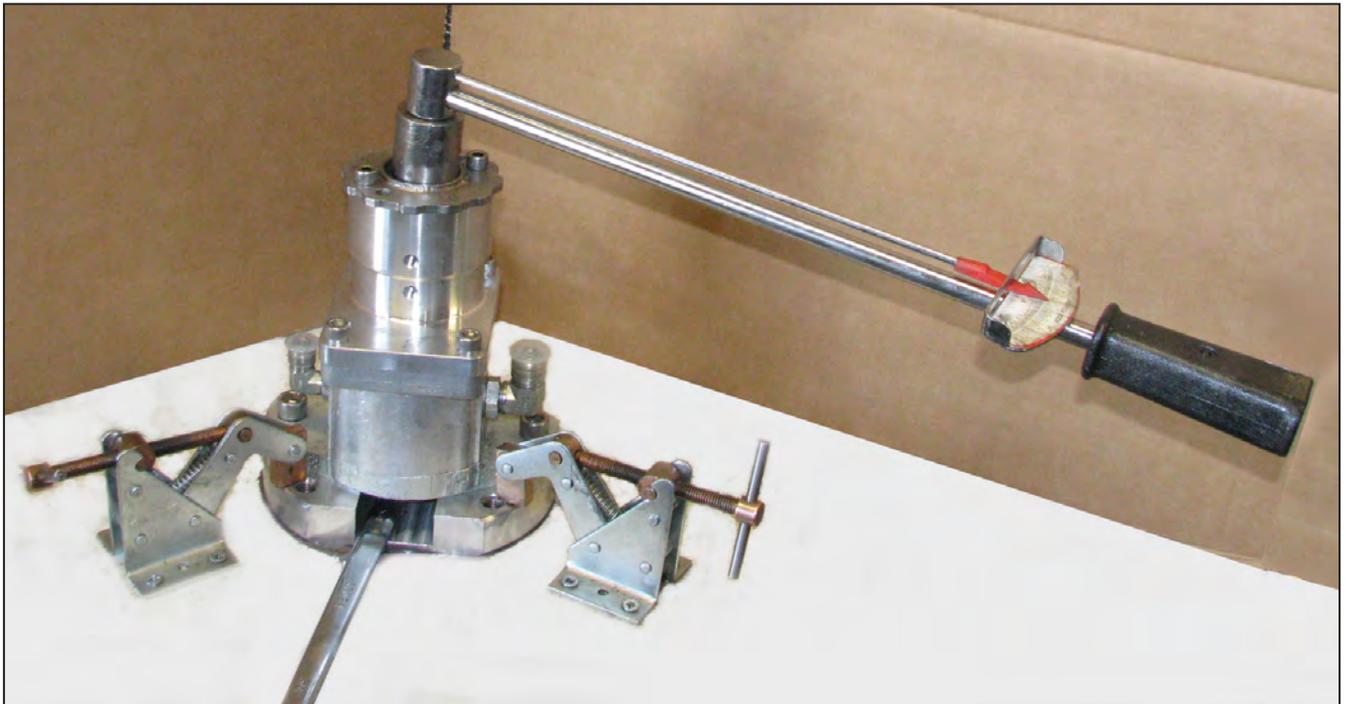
Thrust housing cap bolts securing the spanner tool are snug and a torque wrench and 1 1/8" deep well socket is used to tighten the jam nut to 50 Ft lbs.
